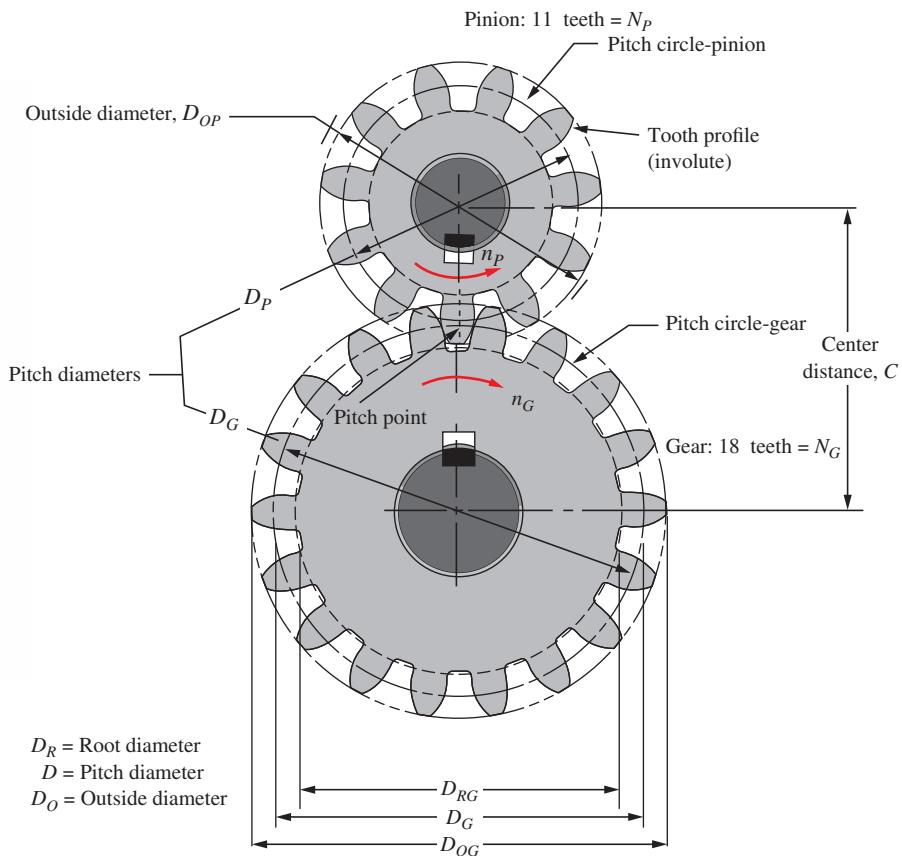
Pair of spur gears. The pinion drives the gear.
